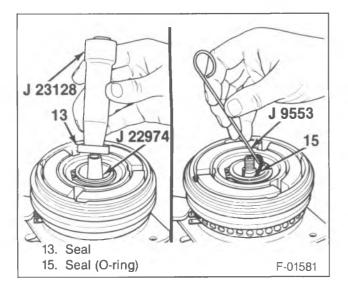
Removing/Installing the Shaft Seal Seat and Seal
